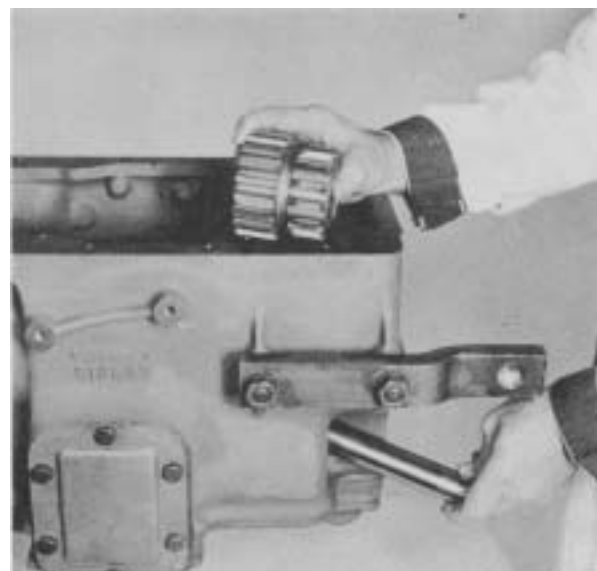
Remove reverse idler gear, bearings, and two thrust washers.
